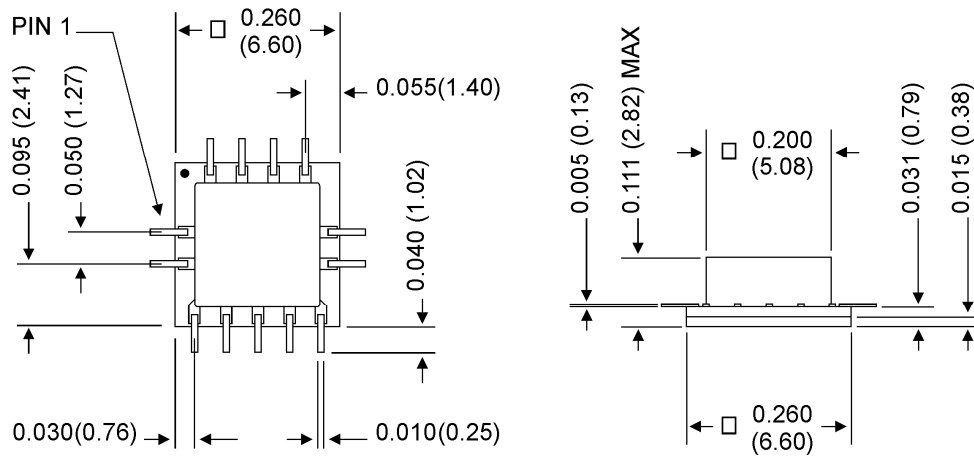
RTH050-HD package outline, dimensions in inches (mm), tolerance $\pm 0.003''$ ($\pm 0.072\text{mm}$).
